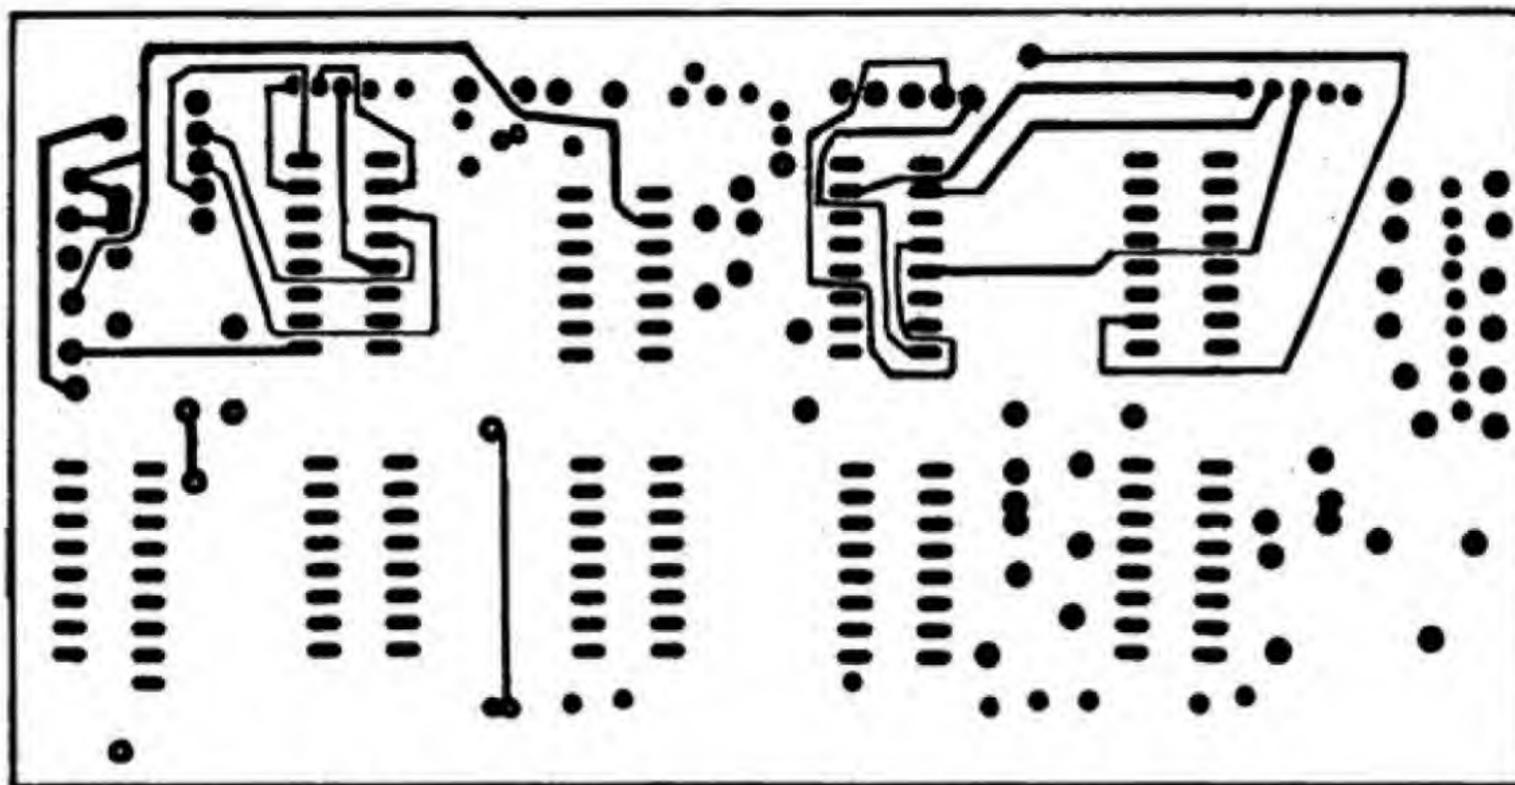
Component side PCB layout for the circuit shown in Fig. 2.
